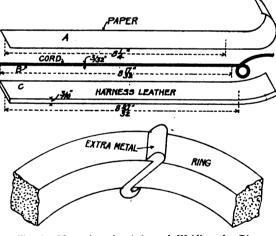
Measuring the Axle and Welding the Ring.
